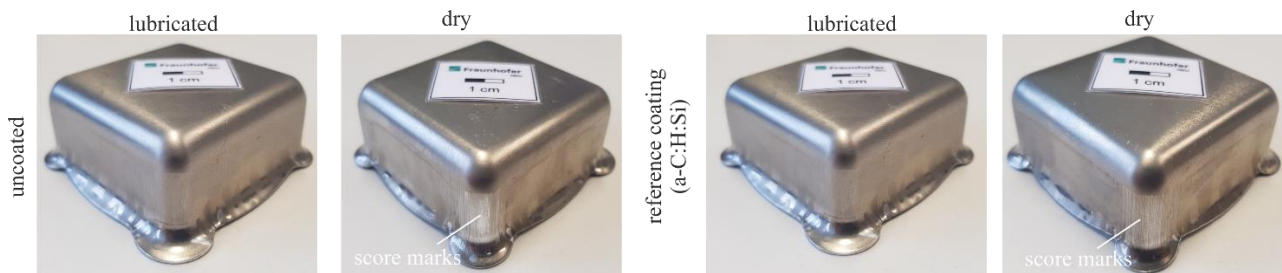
Visual inspection of the part quality after 25 drawing tests
